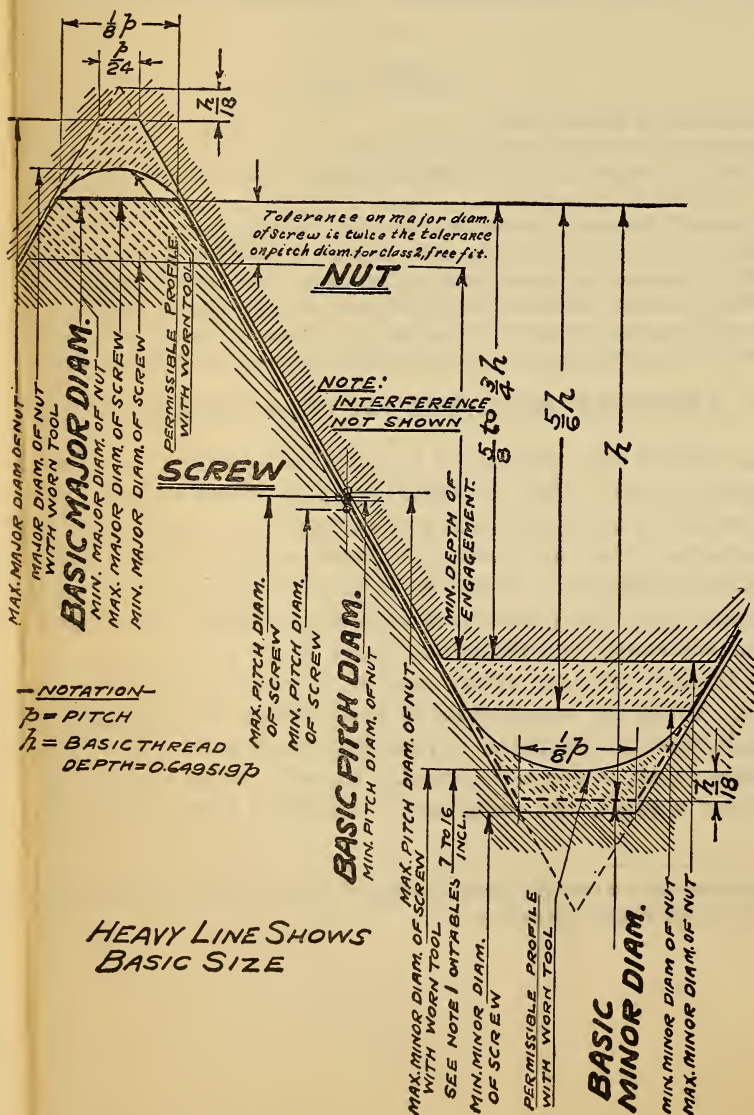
Illustration of tolerances and crest clearances for class 3, medium fit
